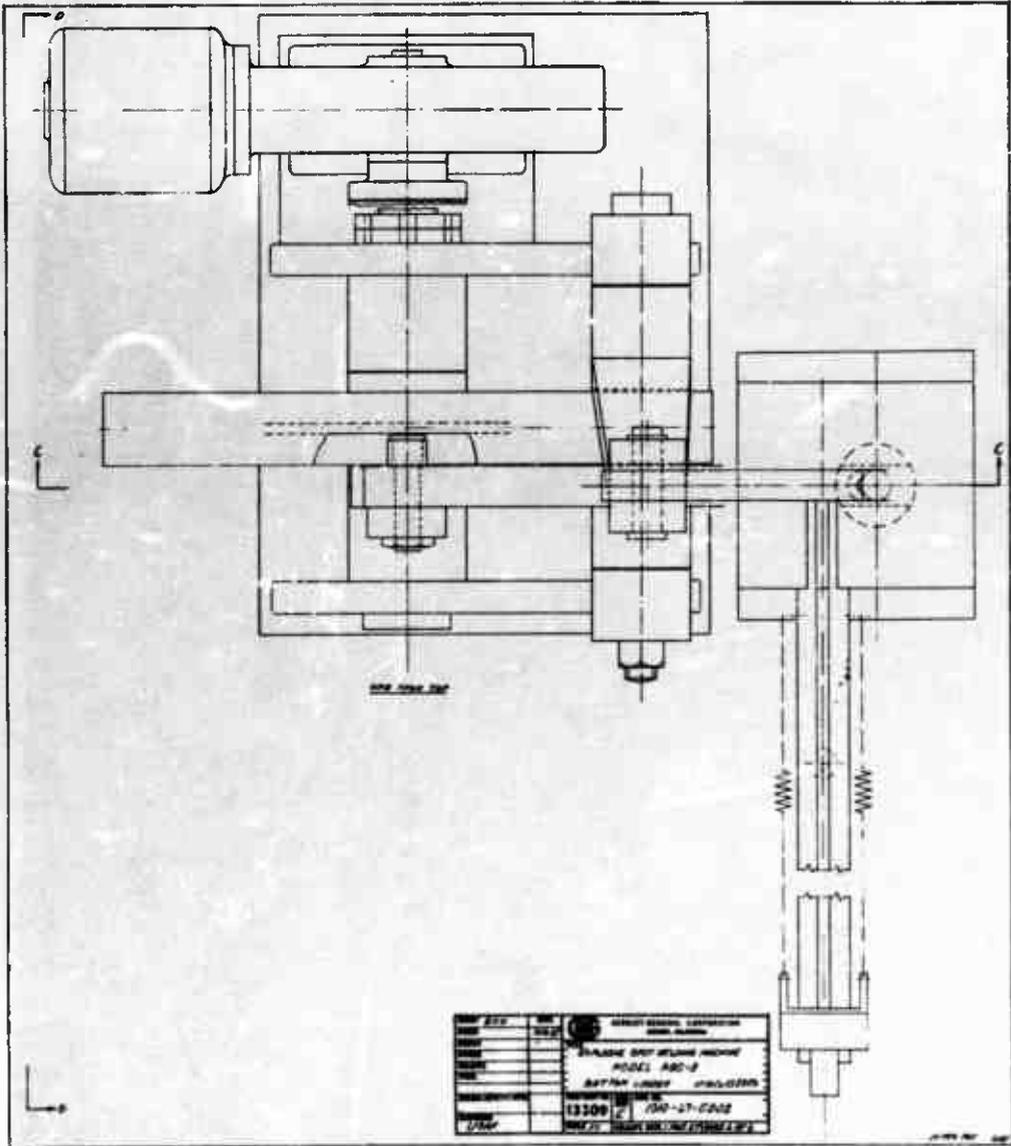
Model AGC-2 Explosive Spot Welding Machine (Sheet 4 of 4).
